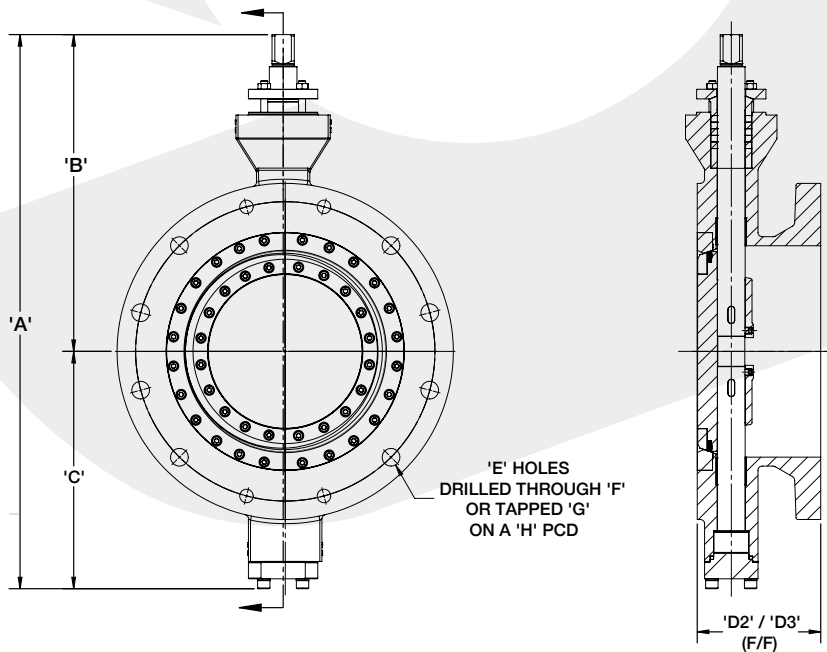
Bare stemmed GA drawing, Triple-Offset Double-Flanged flat-face (BU06).
